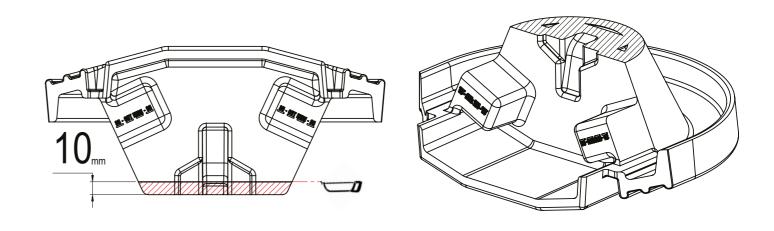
APPLIES TO ALL ROOFS ABOVE 30° PITCH
